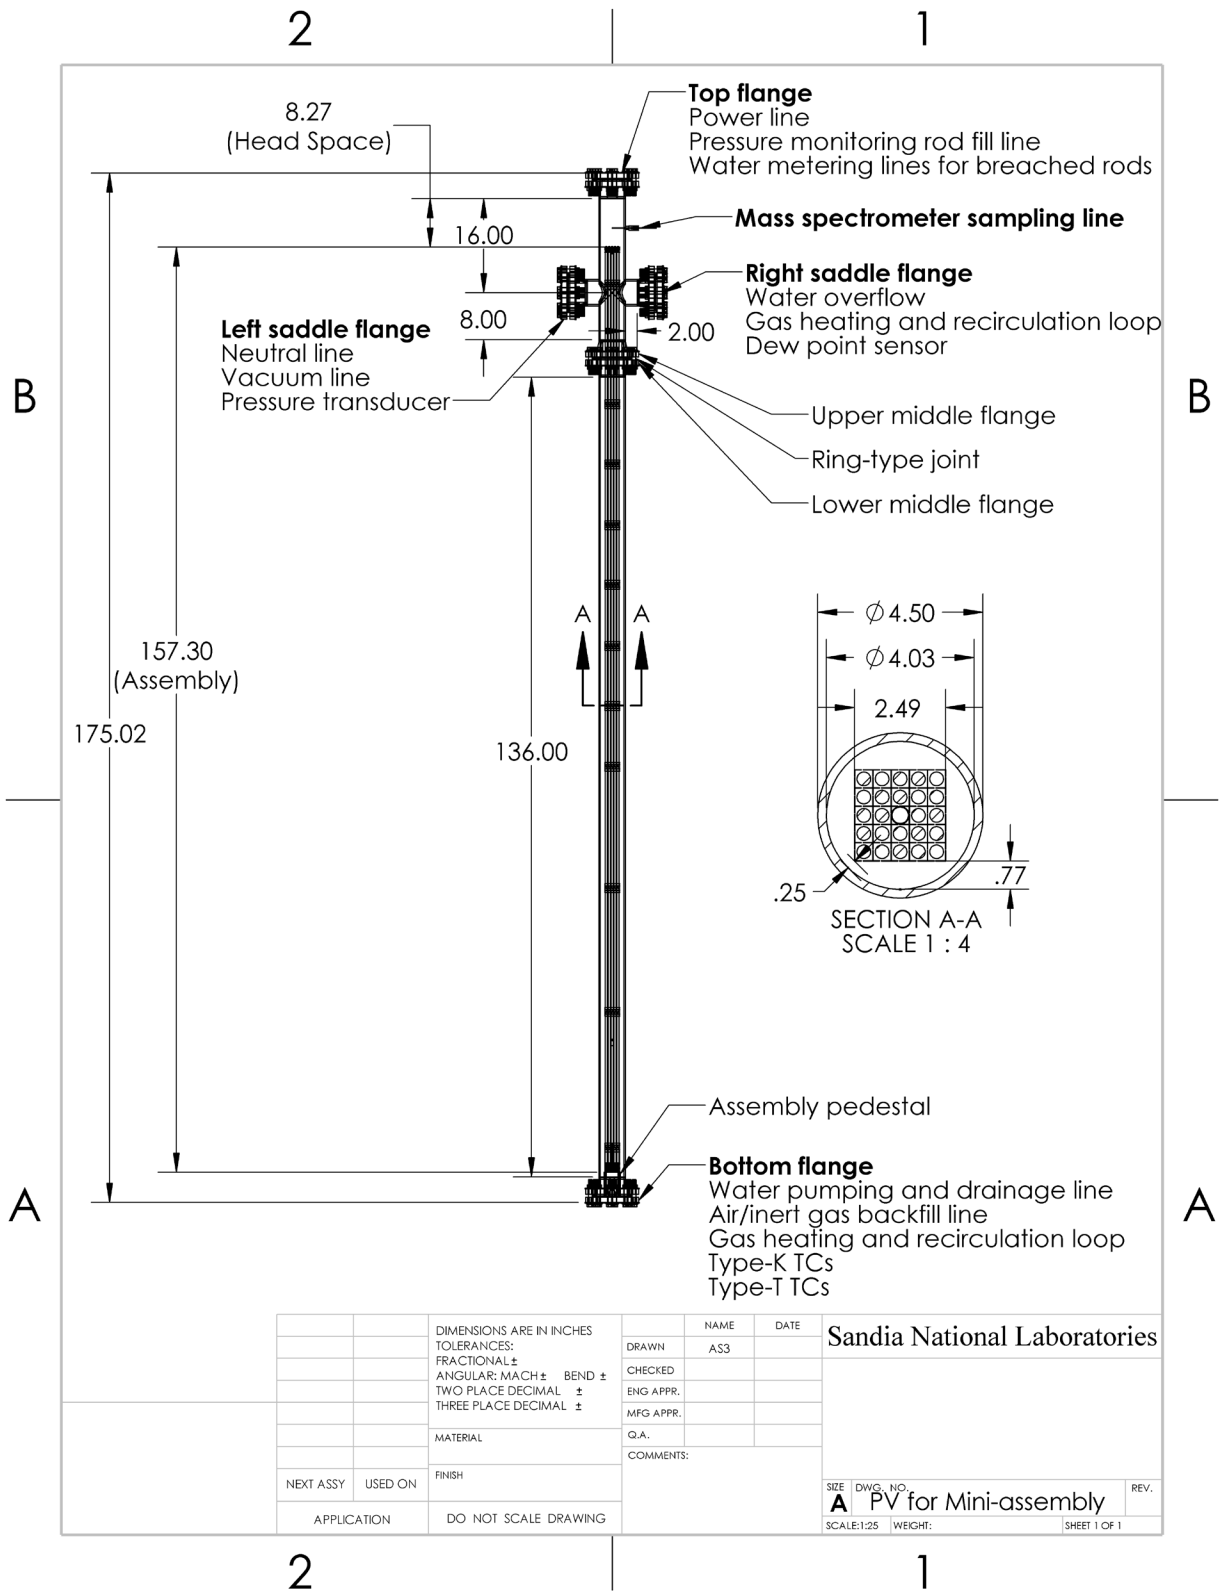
A pressure vessel design concept for the mini-assembly.
